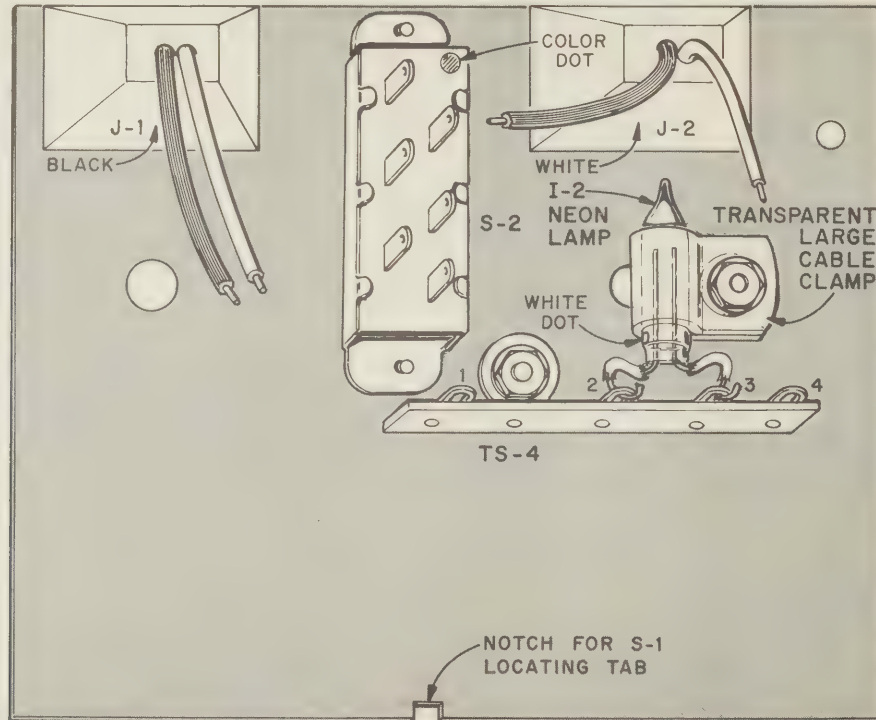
PARTS MOUNTING ON THE SUB-PANEL
